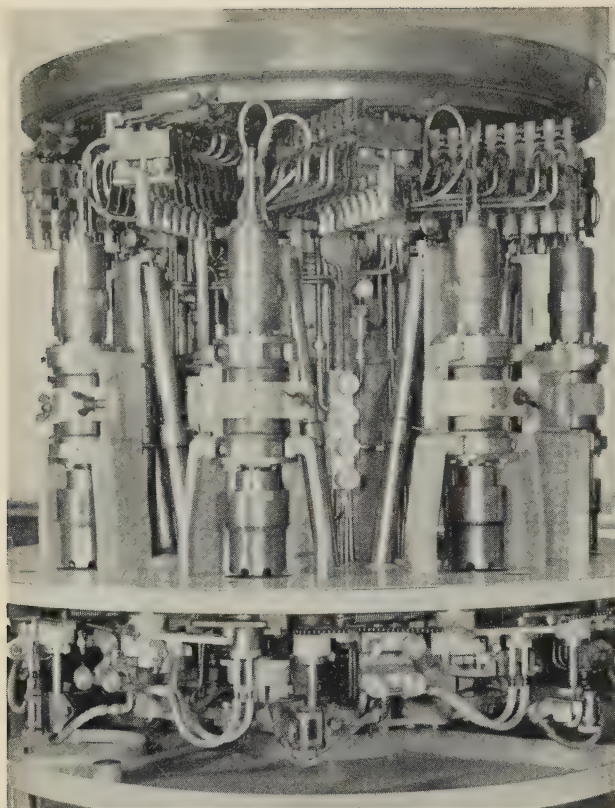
Eight-head machine from which the 16-head type was developed. The construction here gives a better view of the valve-beams and the cam plate.
